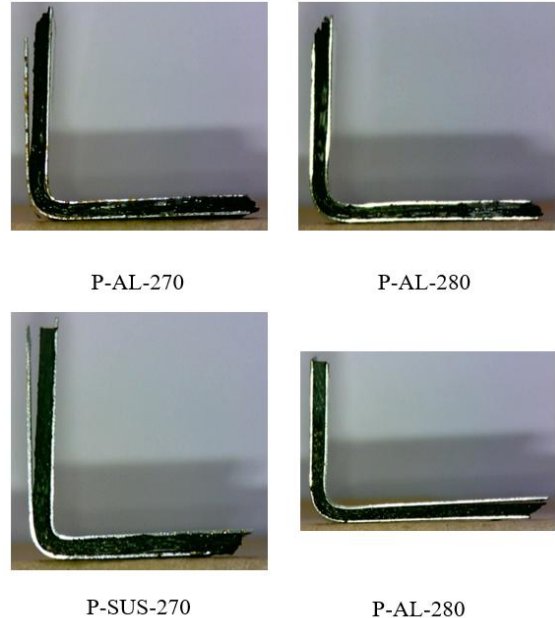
Cross-sectional photographs of each test specimen after V-notch press
